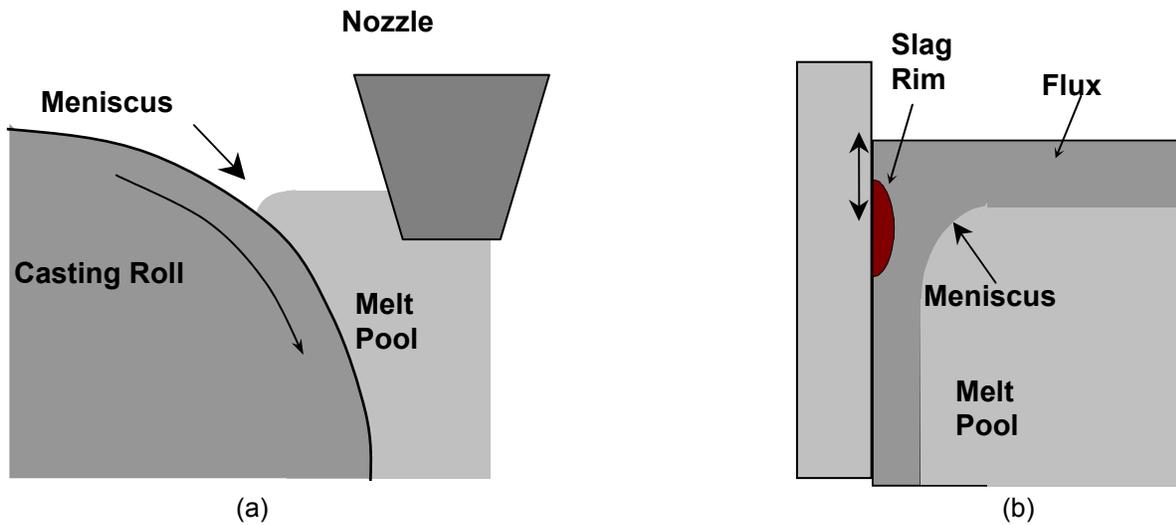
Schematic representation of moulds (a) twin roll strip casting (b) slab casting.
